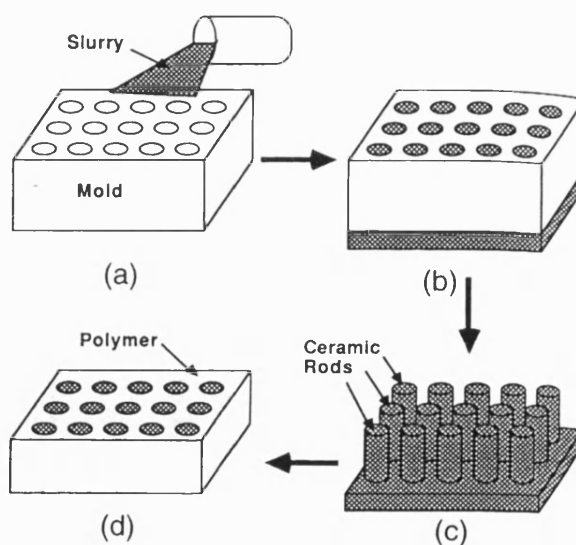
Schematic of the lost mould production method of piezocomposite manufacture. After (13).
